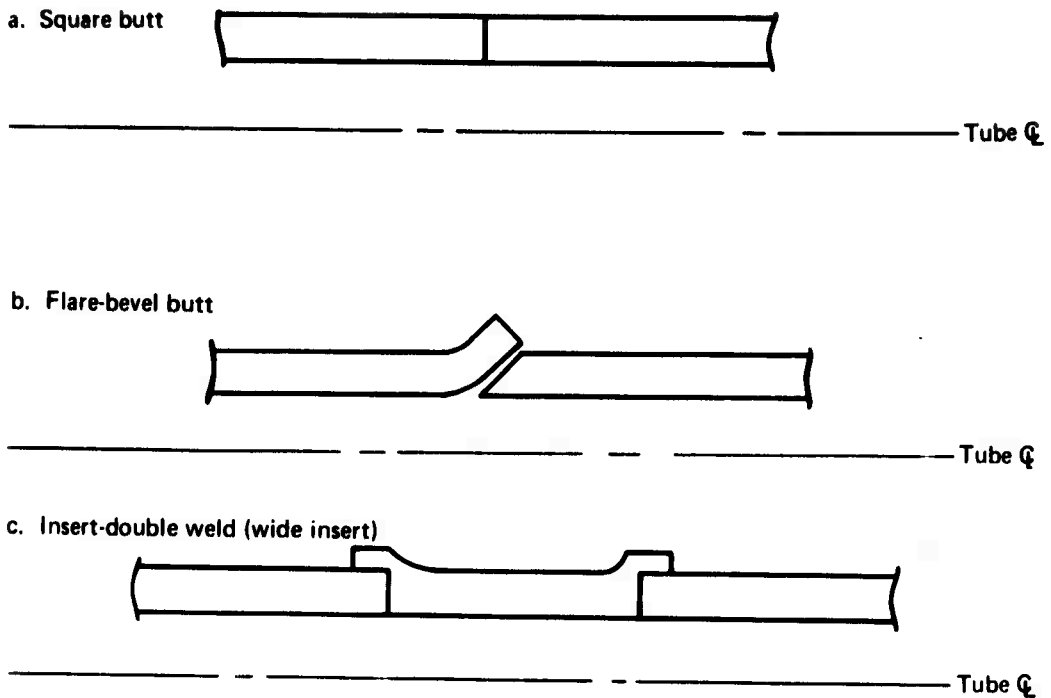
BUTT WELD JOINT CONFIGURATIONS
